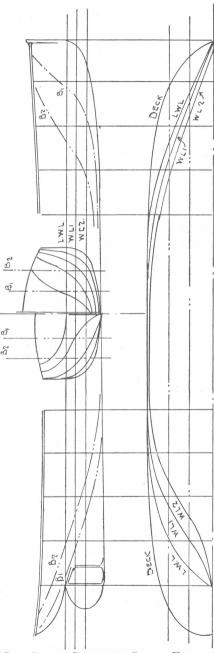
SHEER DRAUGHT SMALL FERRY BOAT.
